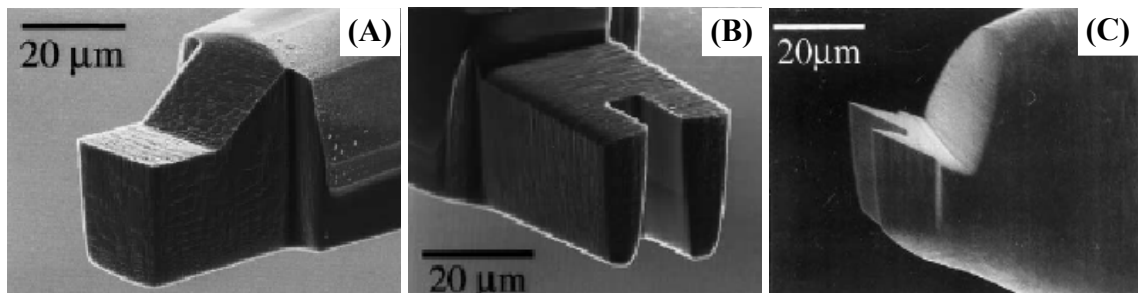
FIB machined micro-scale shaping tools with rectangular rake face (A) a split rectangular rake face (B), and a double v-shaped rake face (C) [22]
